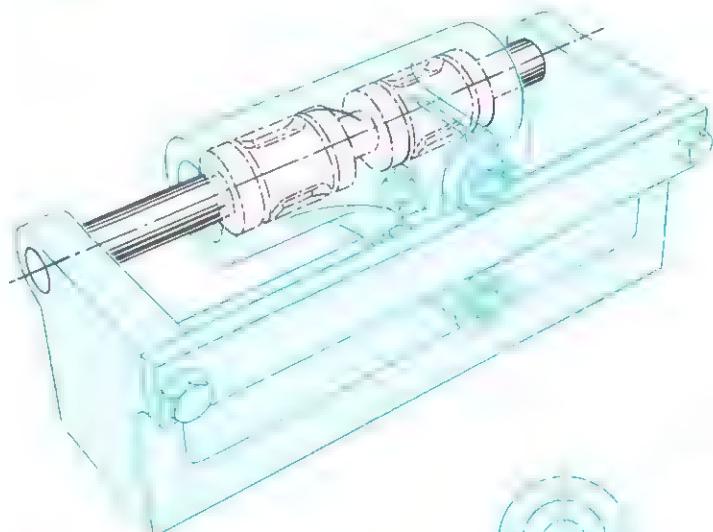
Carriage on Single Shaft in Combination with a Torque Roller
